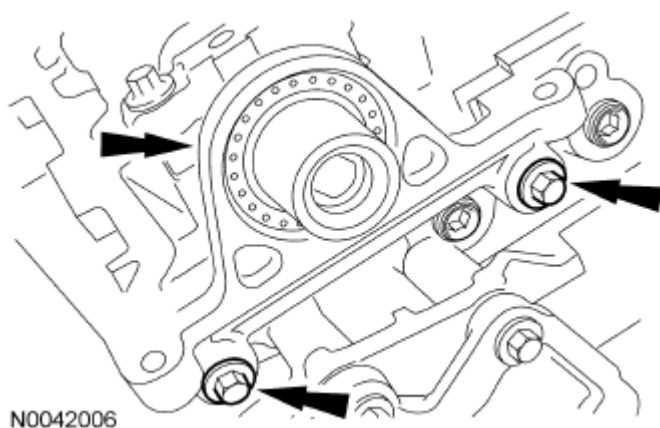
Locating Camshaft Oil Seal Retainer With Bolts
